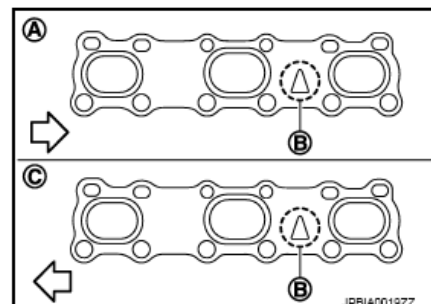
Identifying Circle Press Area On Exhaust Manifold Gaskets
